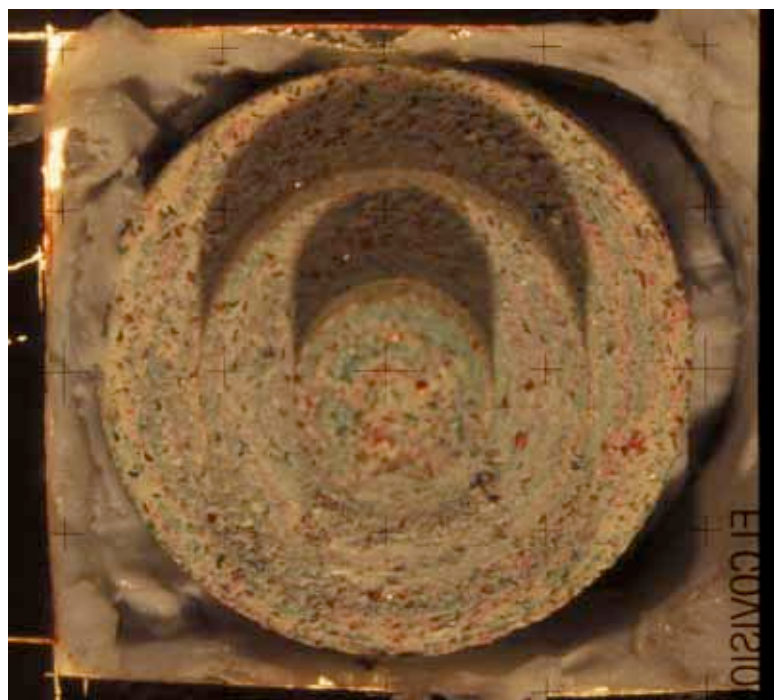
Machined test object fabricated from modified epoxy resin.
